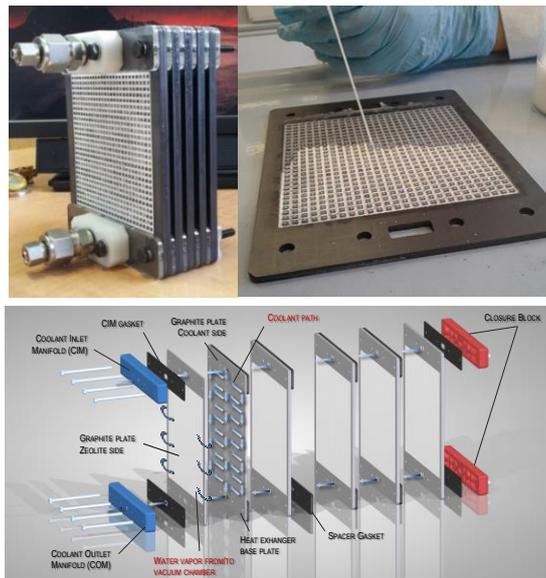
Concept of the graphite/zeolite adsorber: assembled prototype (upper left); Coating with adsorbent (upper right), exploded view (bottom).
